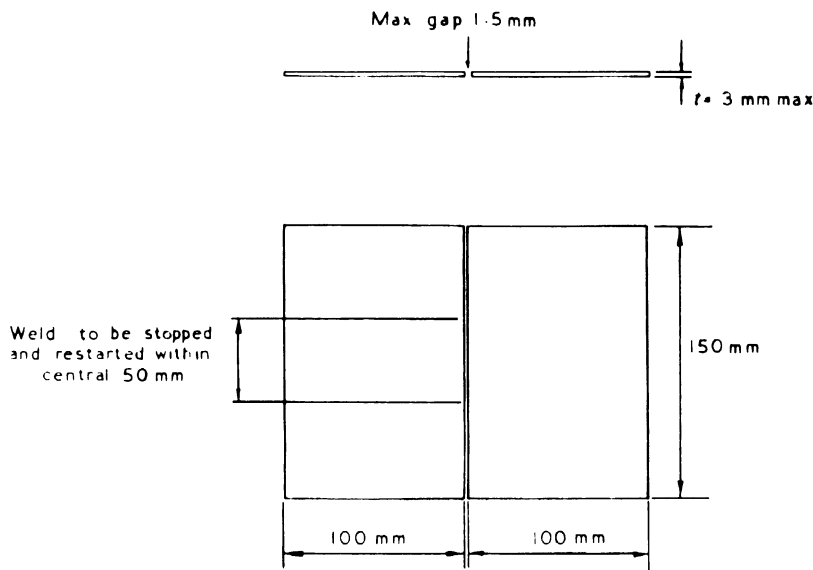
Test piece for butt weld in sheet (without permanent backing)
